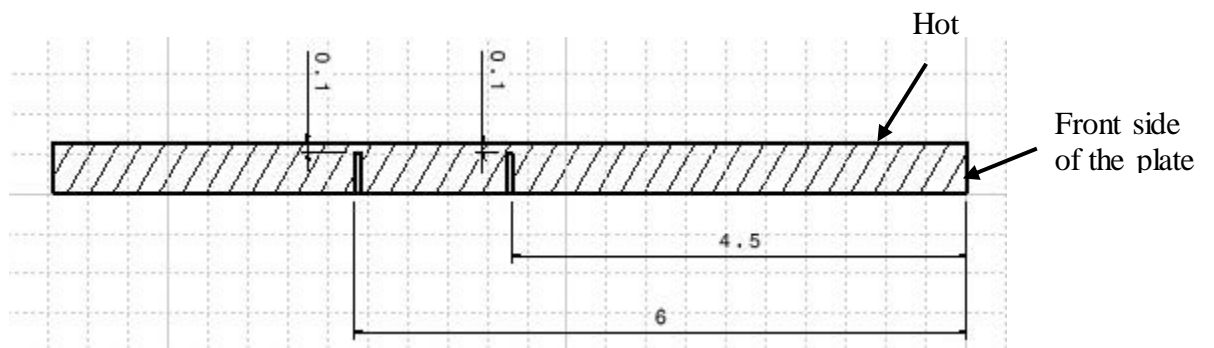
Side view of the stainless steel plate showing thermocouples depth
